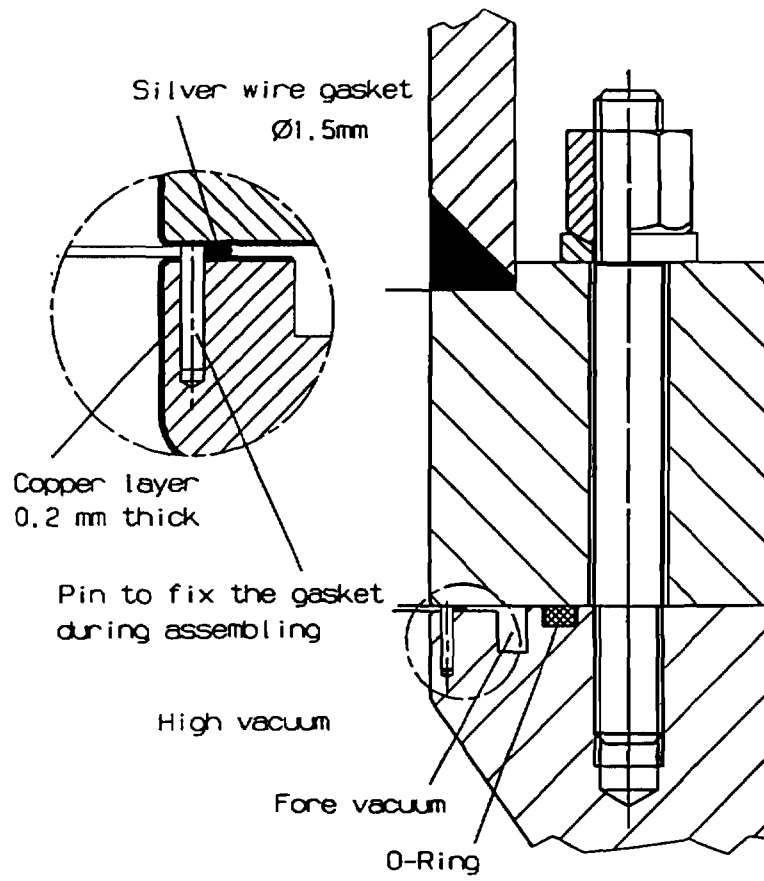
Details of Vacuum Sealing on Large Tank Flange
